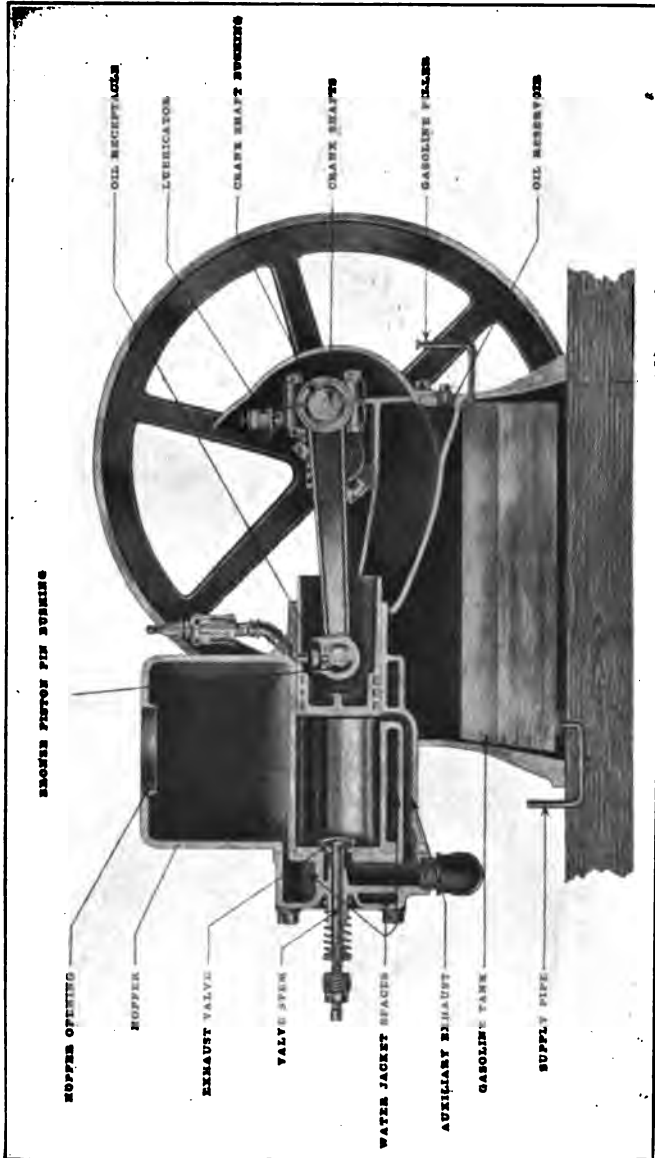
Sectional view showing internal construction of the Gray farm motor.
